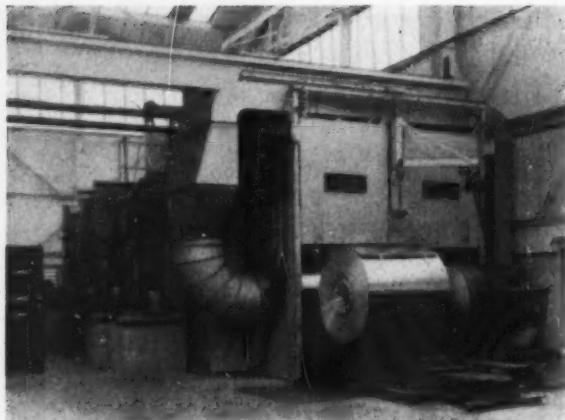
Overall front view of the 166 ft. long roller hearth furnace.
